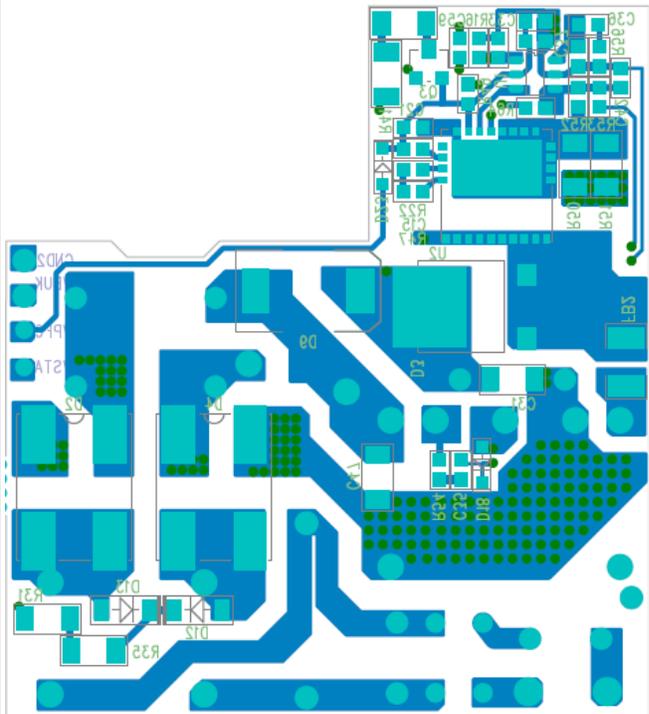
(Bottom), Bottom View of PCB, TSOP6
